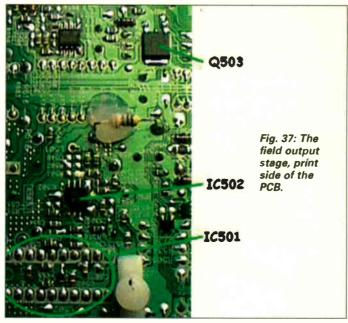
shows the field output stage from the component side and Fig. 37 the layout on the print side of the PCB.
